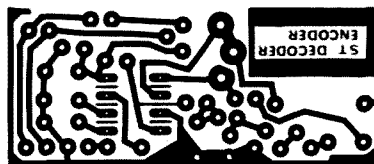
Full-size layout of PCB for the single-tone encoder-decoder.
